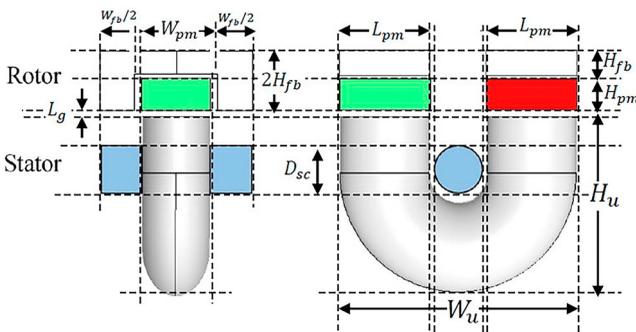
Design dimensions of one pole pair of exterior rotor FB-TFPMG.
